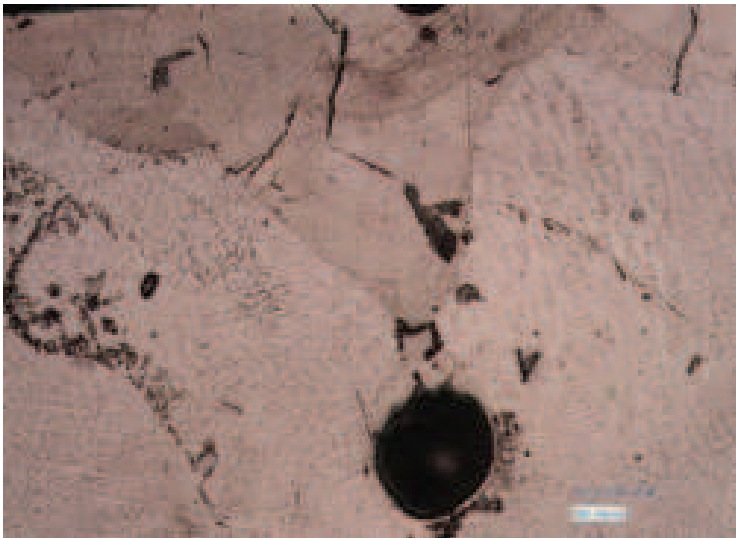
Sample of laser welding by Rofin with filler chemically attacked
